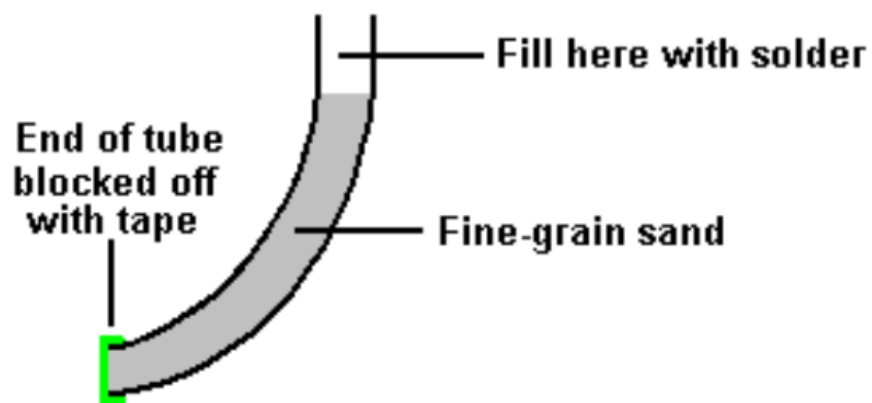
Method used to block off the end of the copper tube with silver solder, is to seal the far end of the tube with tape, and fill the tube with fine-grained sand.
